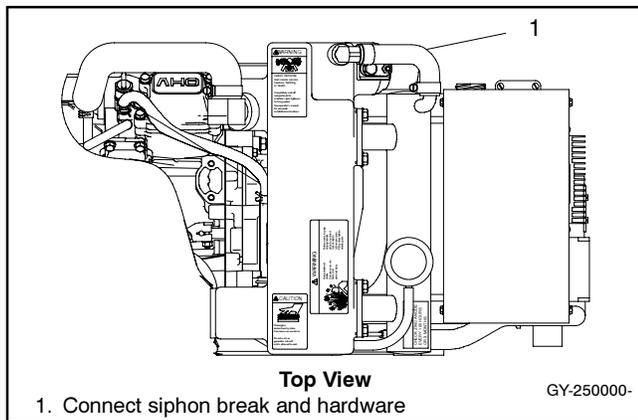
Siphon Break Connection, 5/7.3E and 4/6EF
